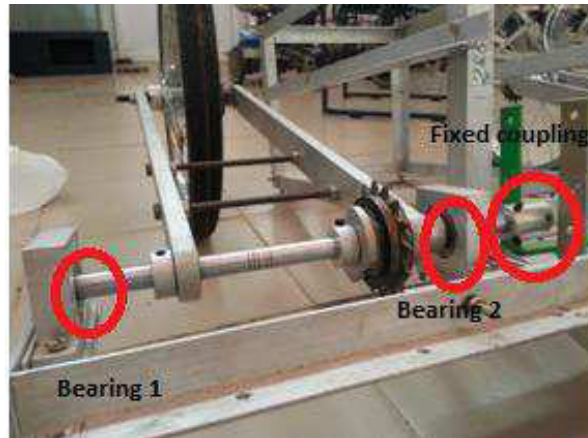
Rear wheel assembly. Clearly the shaft used is very long. The numbers of components aligned co-axially are many.
